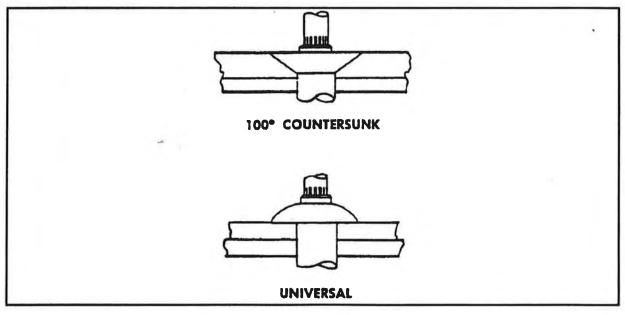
Head styles (bulbed Cherrylock rivets)
